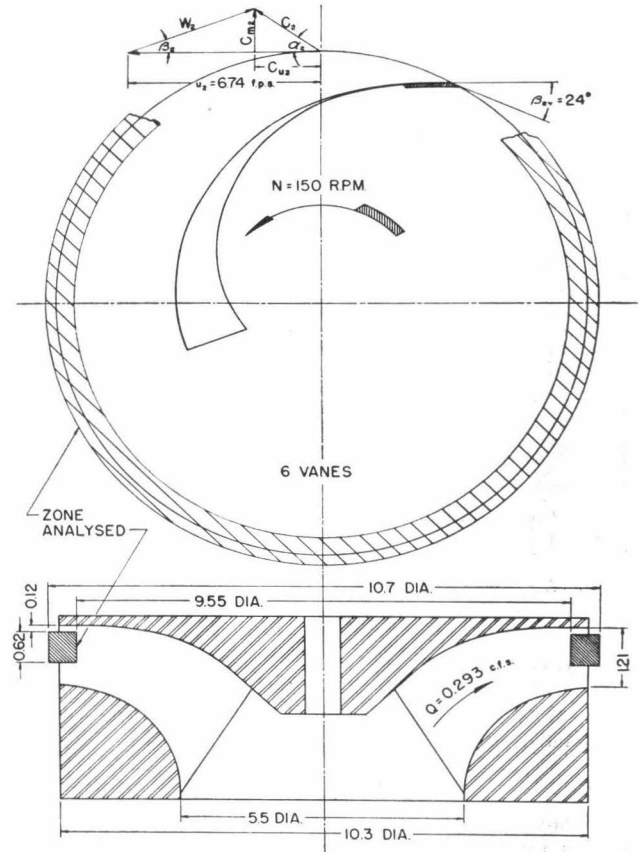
PRINCIPAL DIMENSIONS OF TEST IMPELLER
